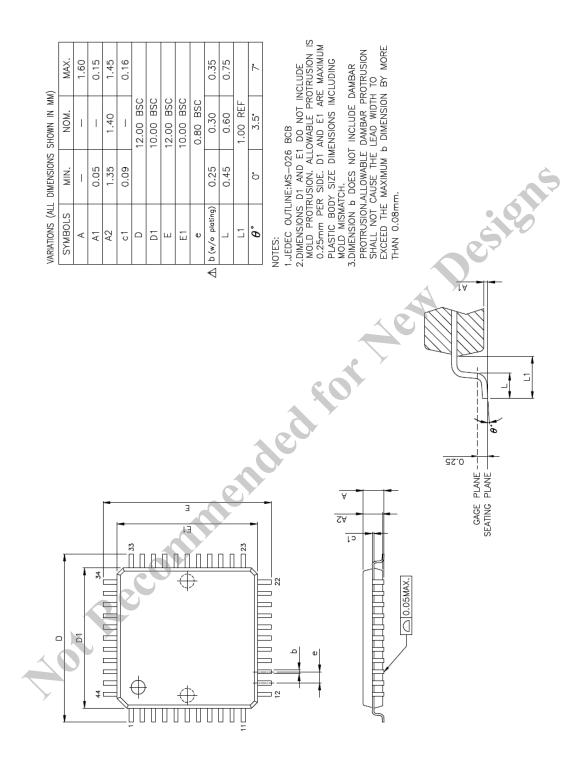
LQFP44\_PKG\_dimensional outline drawing
